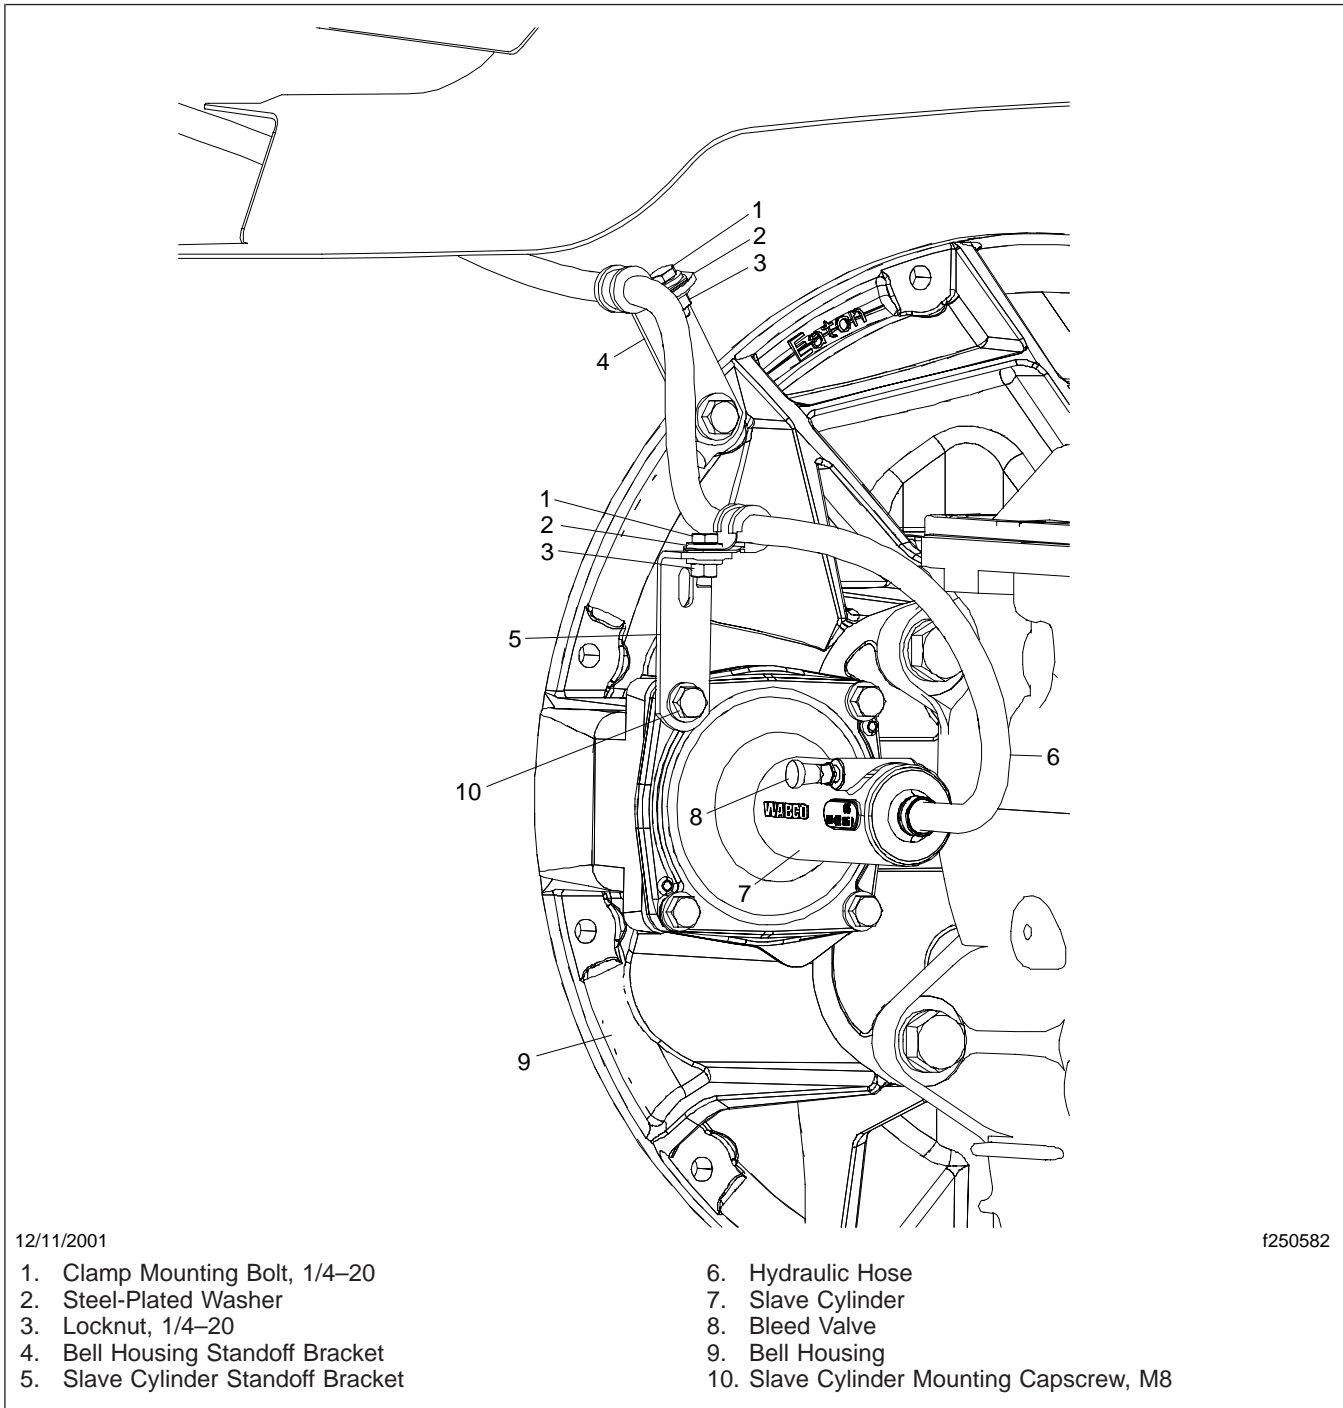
, Slave Cylinder, Hydraulic Clutch Control
